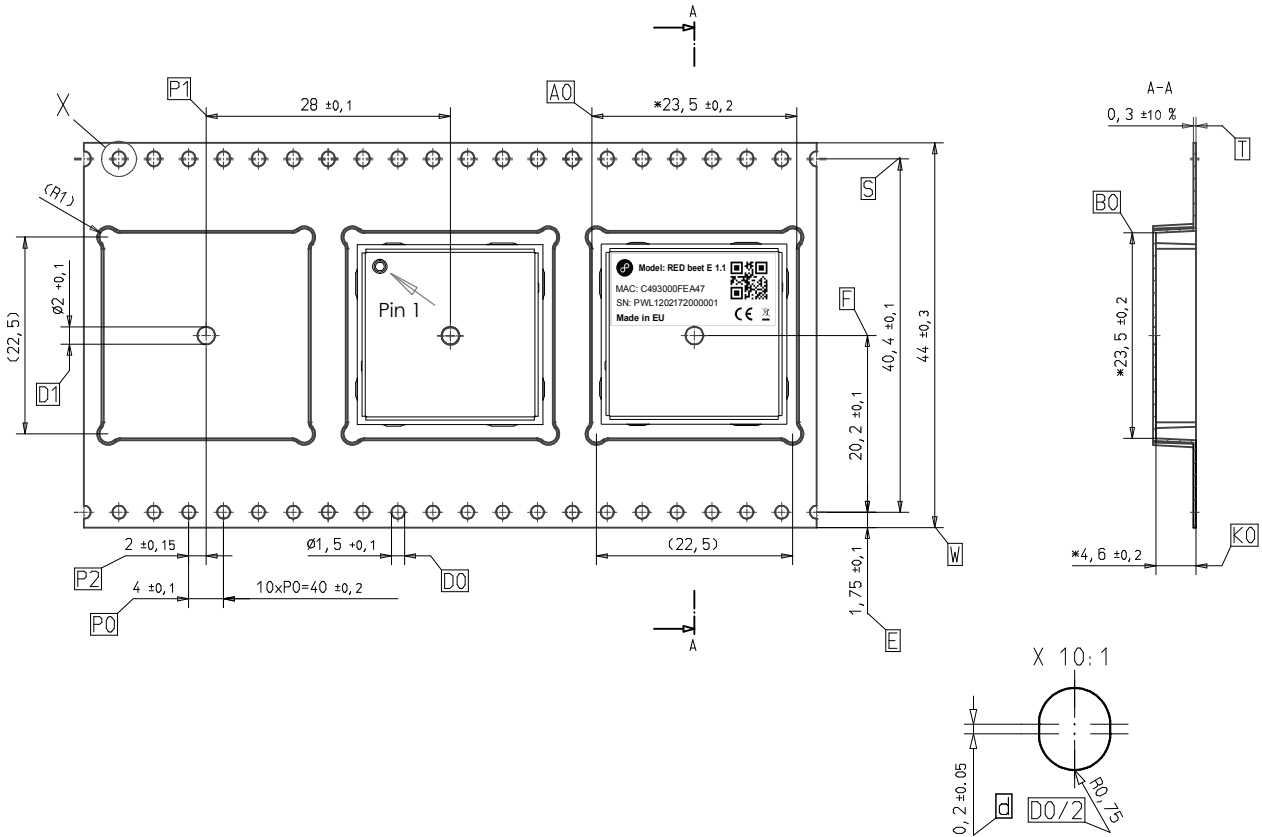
RED-BEET 1.1 PACKAGING REEL DIMENSIONS
